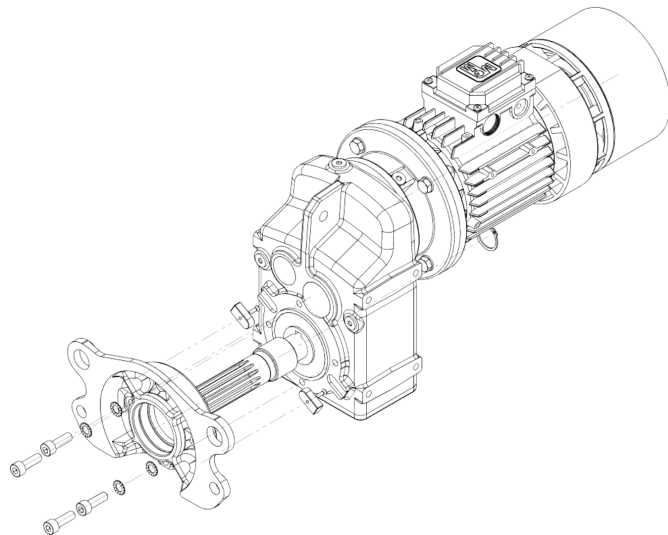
Exploded view of parallel shaft gearbox with gearbox mounting flange
